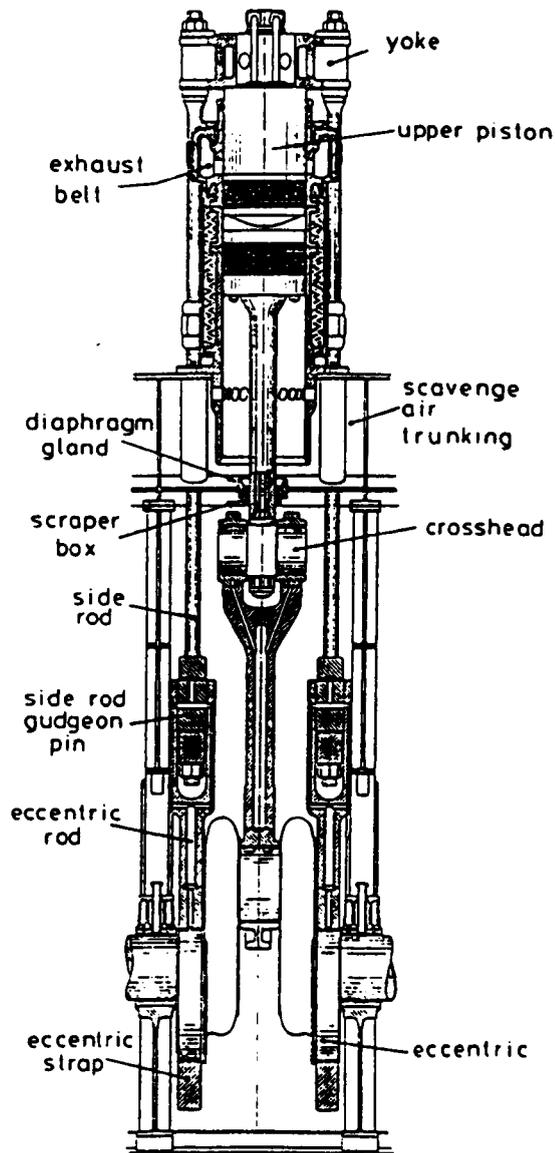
h.3 Section through Cylinder of H&W Opposed Piston Engine
